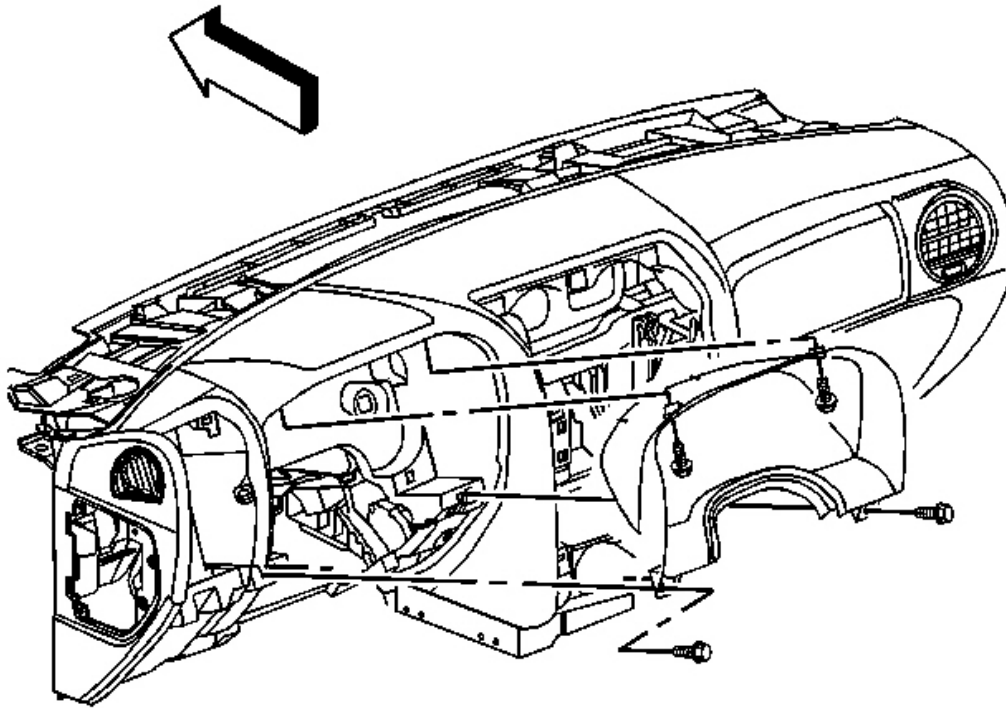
Identifying Knee Bolster Trim Panel & Retaining Screws
